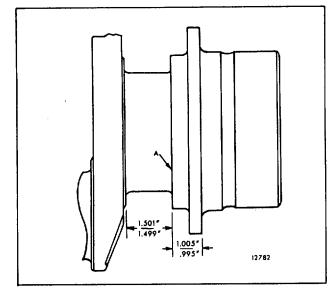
Standard Dimensions at Crankshaft Thrust Surfaces
